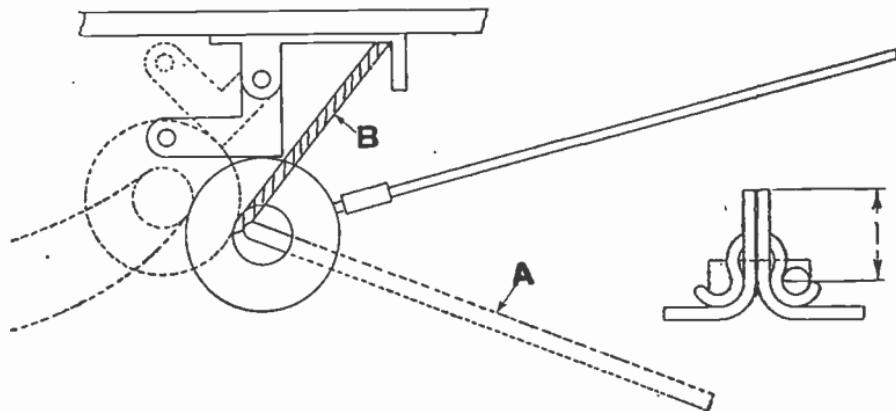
,454 to 6,456.—Safety belt fastener and method of attaching. This fastener requires that the two ends of the belt be turned up perpendicular to the run of the belt, the ends being held firmly together by a plate on each side and two links extending through holes in the plate and punched holes in the belt. These links are held in place by wedges which are driven through slots in the links. The inclined surface of the wedge furnishes a means by which the side plates may be driven up tight against the belt under considerable variation in the belt thickness. A suitable clamping may be obtained for any thickness of belt by the use of one of three different lengths of link marked 4 ply, 4½ ply and 5 ply respectively. *To apply fastener*, cut the ends of the belt square across at the correct length. Draw lines square across the belt 1 inch from each end. Punch the holes for fasteners on these lines, using as a template, a fastener or template furnished with the belt cutter. A special belt punch should be used for making the holes the correct size and shape.
